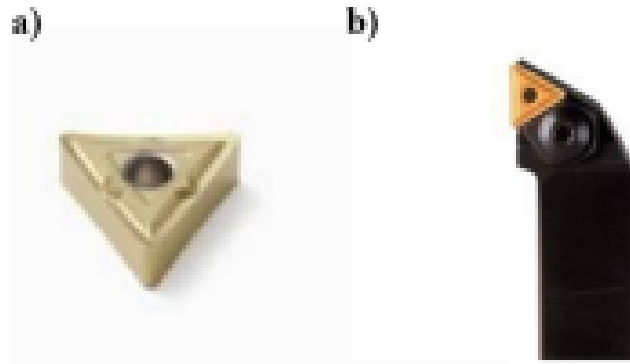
a) TNMG160408-MF1 CP500 Insert, and b) PTGNL2020K16 Tool Holder. [9-10]
